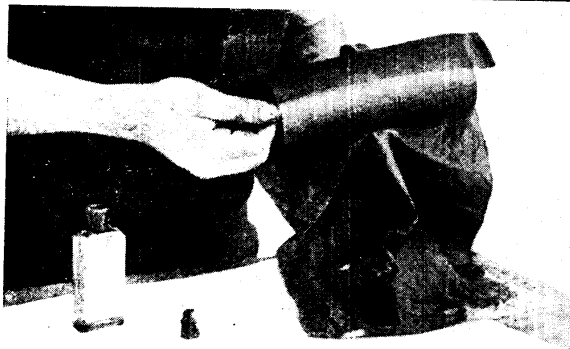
Linen soaked in thin shellac varnish is being used to cover the cardboard tube
